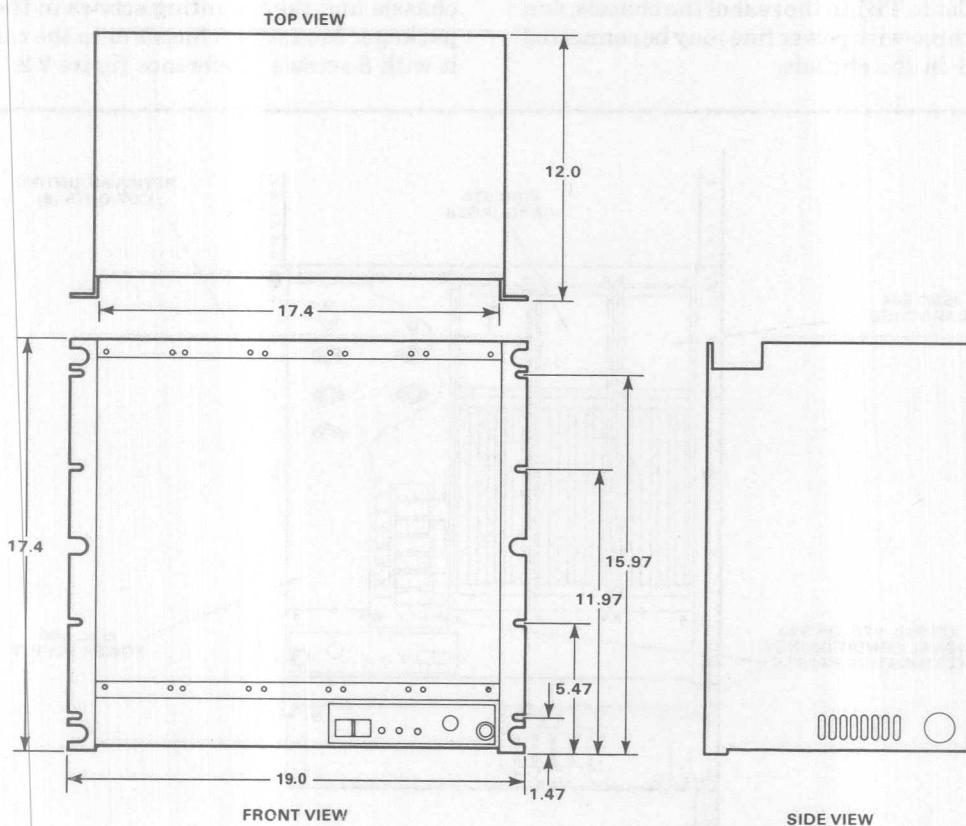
iCS 80 Chassis Dimensions (Inches)
